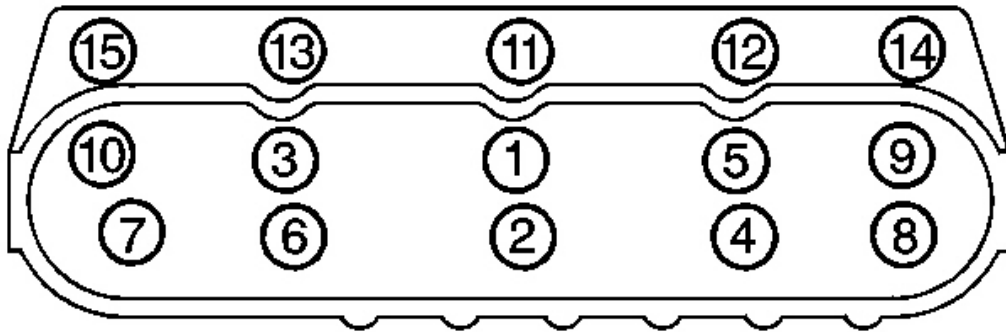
Cylinder Head Bolt Tightening Sequence (Right)
